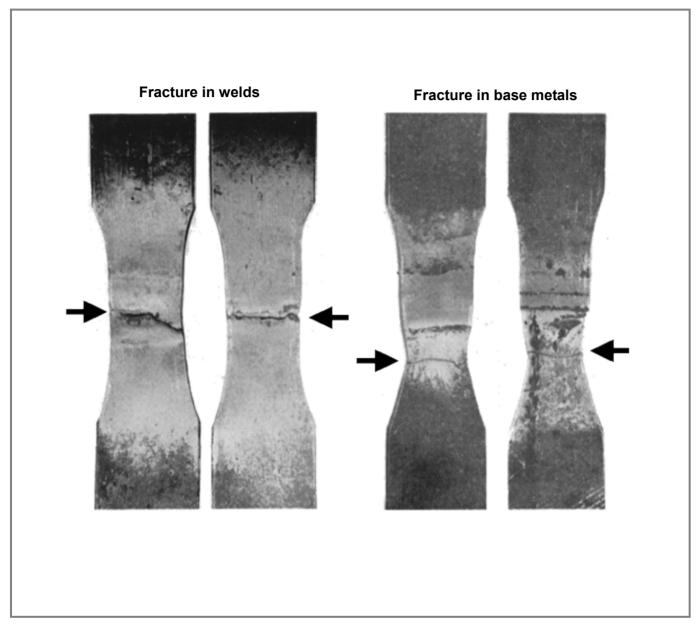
Fracture in welds caused by weld imperfections (Tension test results of weld joints)
